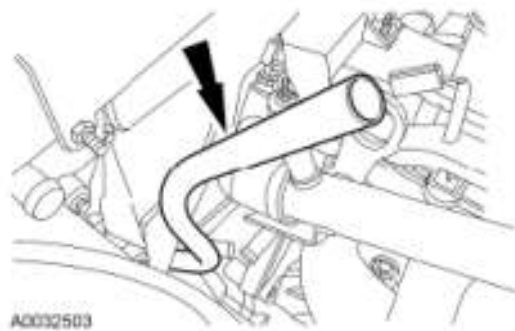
Locating Transmission Fluid Indicator And Tube Assembly
